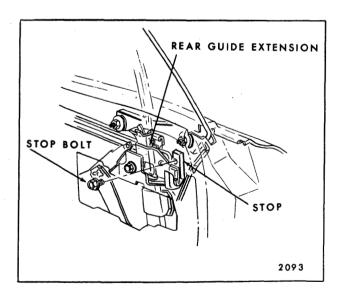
Window Rear Up-Stop - "A-39" Style
